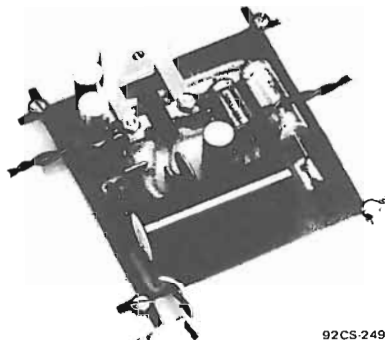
Bottom view of printed-circuit boards shown in Figs. 5 and 6.
